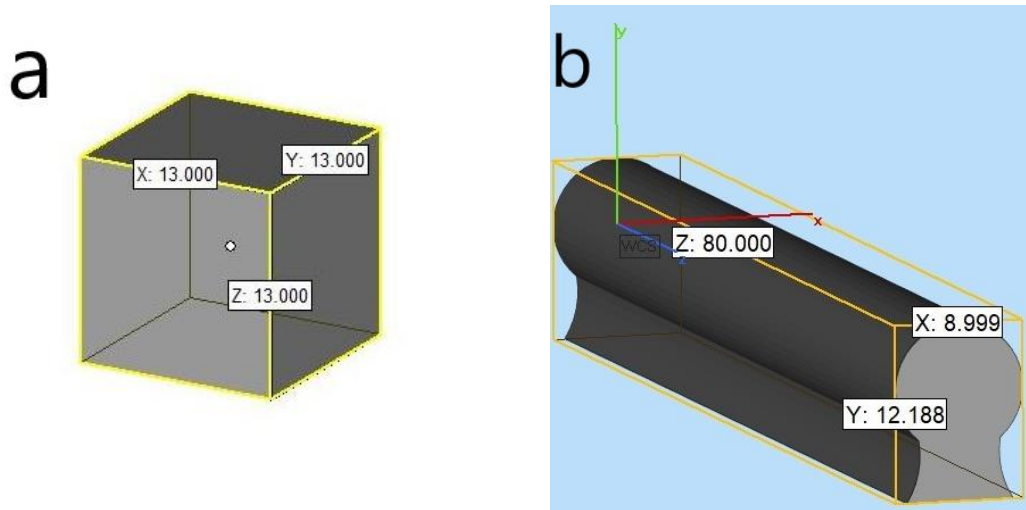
A schematic of a) cube sample b) tensile sample drawing for the DMLS process
